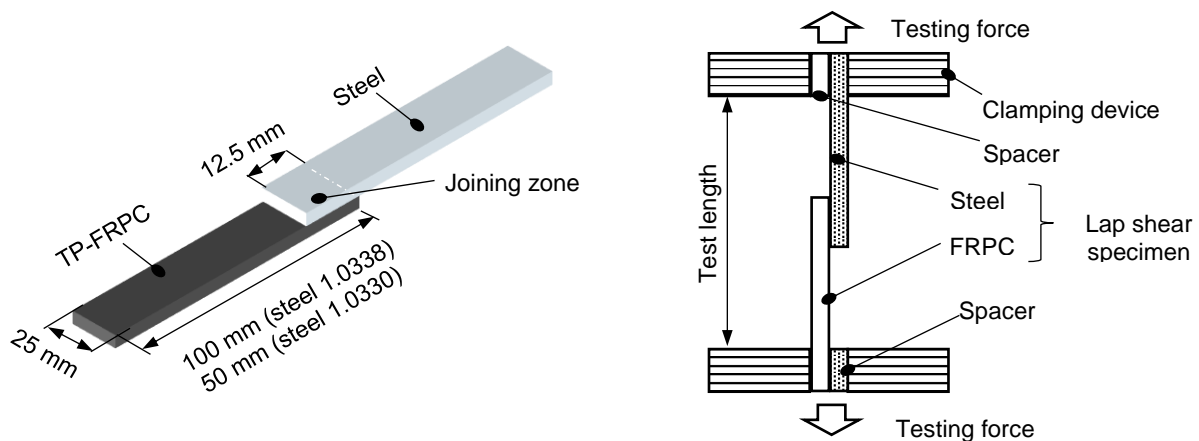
Dimensions of lap shear specimen according to DIN 1465 (left hand) and schematic sketch of the experimental set-up of lap shear test (right hand)
